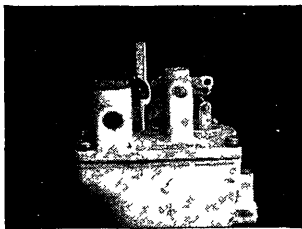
(see Fig. 100). Adjust metering rod after pump adjustment is made. Insert metering rod gauge in place of metering rod, seating tapered end in jet. With throttle valve seated there should be less than .005" clearance between metering rod pin and shoulder of notch in gauge. Adjustment can be made by bending metering rod pin portion of pump arm up or down as shown in Fig. 135
